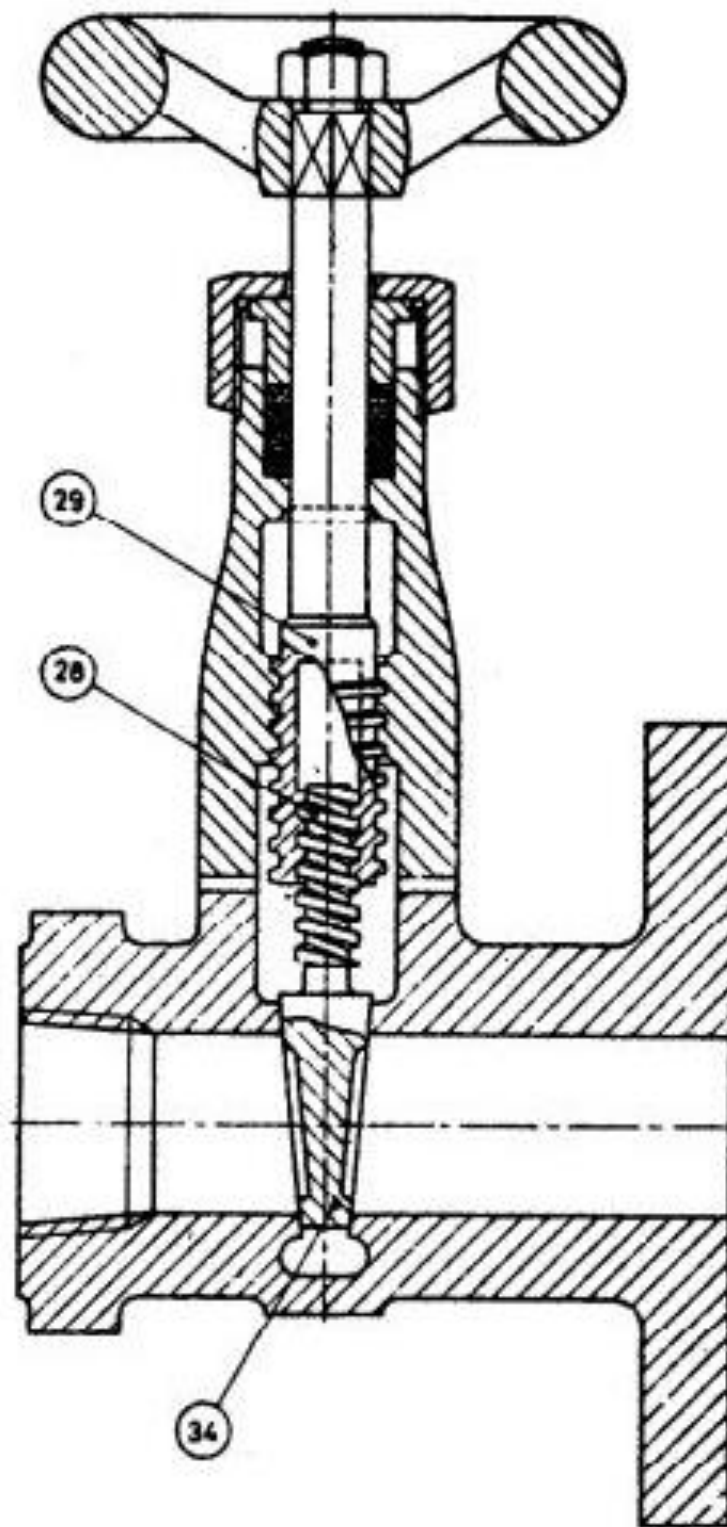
INSIDE SCREW, SOLID WEDGE, RISING SPINDLE, RISING STEM
